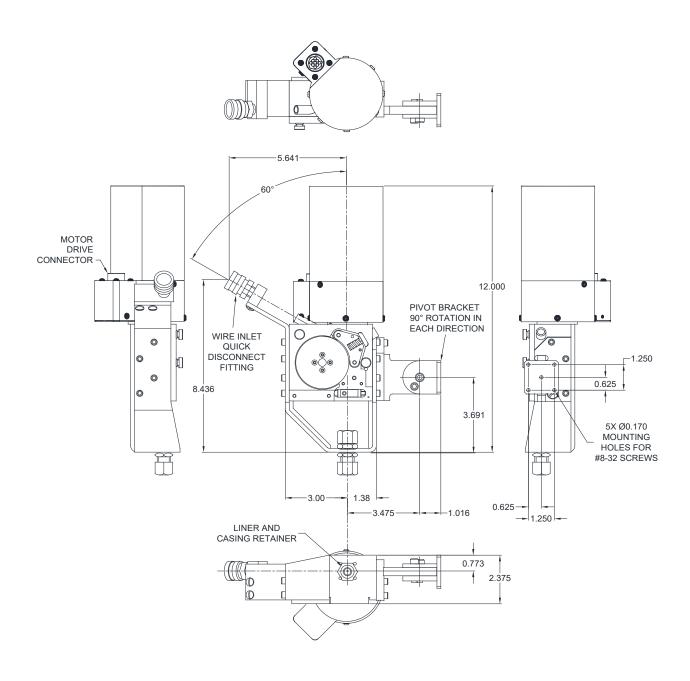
WF-200 Capstan Mounting Dimensions (P/N: E2A5225)
